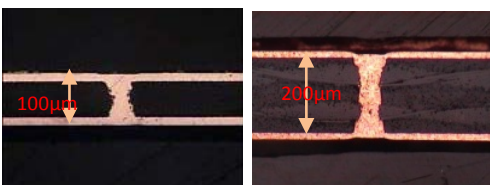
Double sided laser drilled through hole in 100um and 200um thick panels respectively
